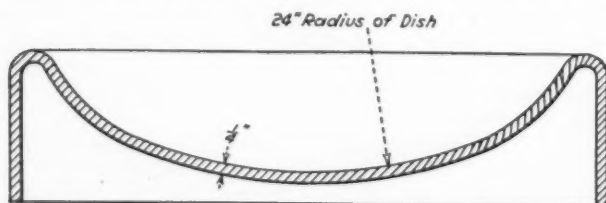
DISHED HEAD WITH REVERSED FLANGE
